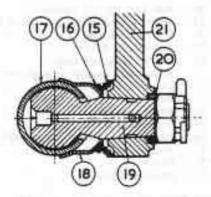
FIG. HA. SECTION THROUGH PENDULUM LEVER BALL PIN.
